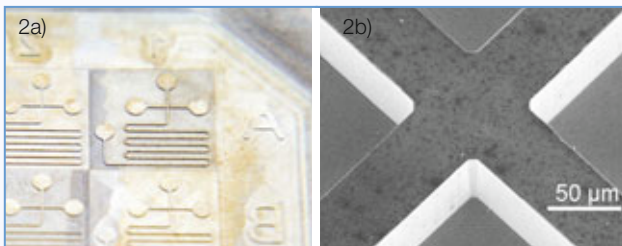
Mould insert made of brass, manufactured by micro-milling.
